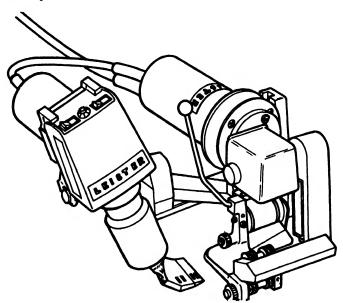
Leister hot air automatic welding machine for overlap welding of thermoplastic film.
